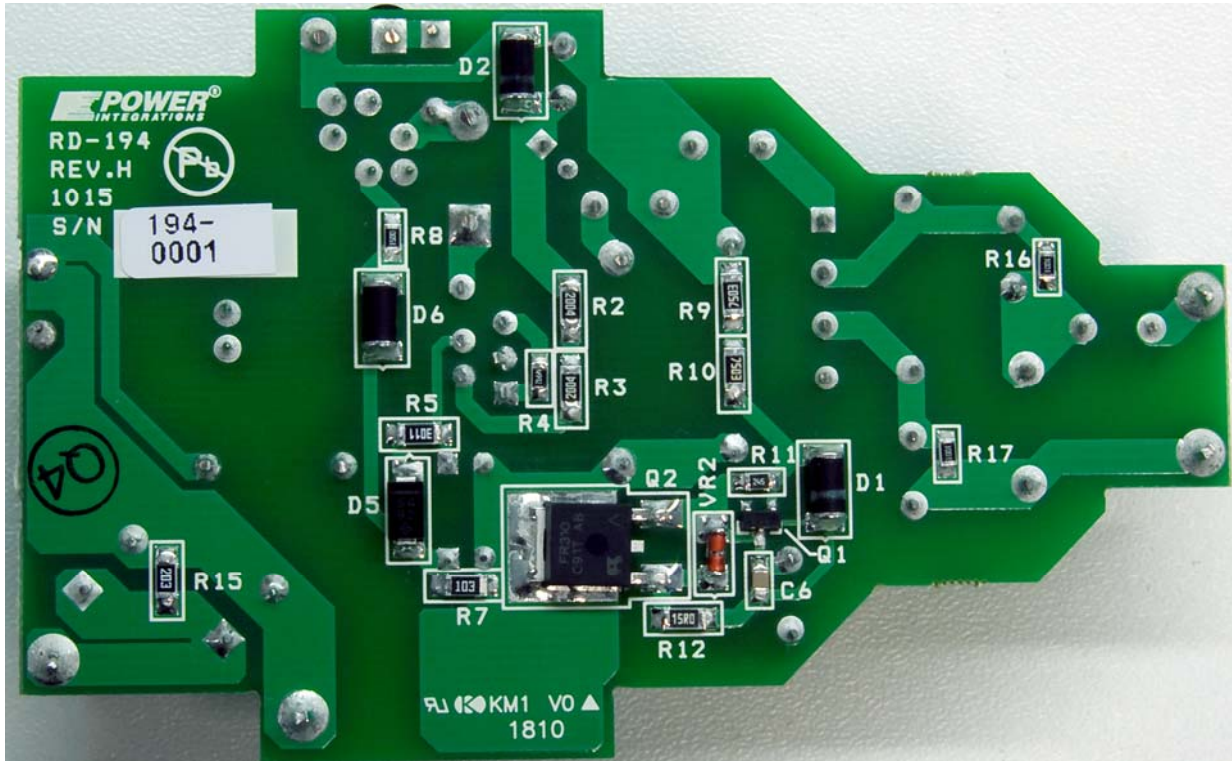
Populated Circuit Board Photograph (Bottom View).
